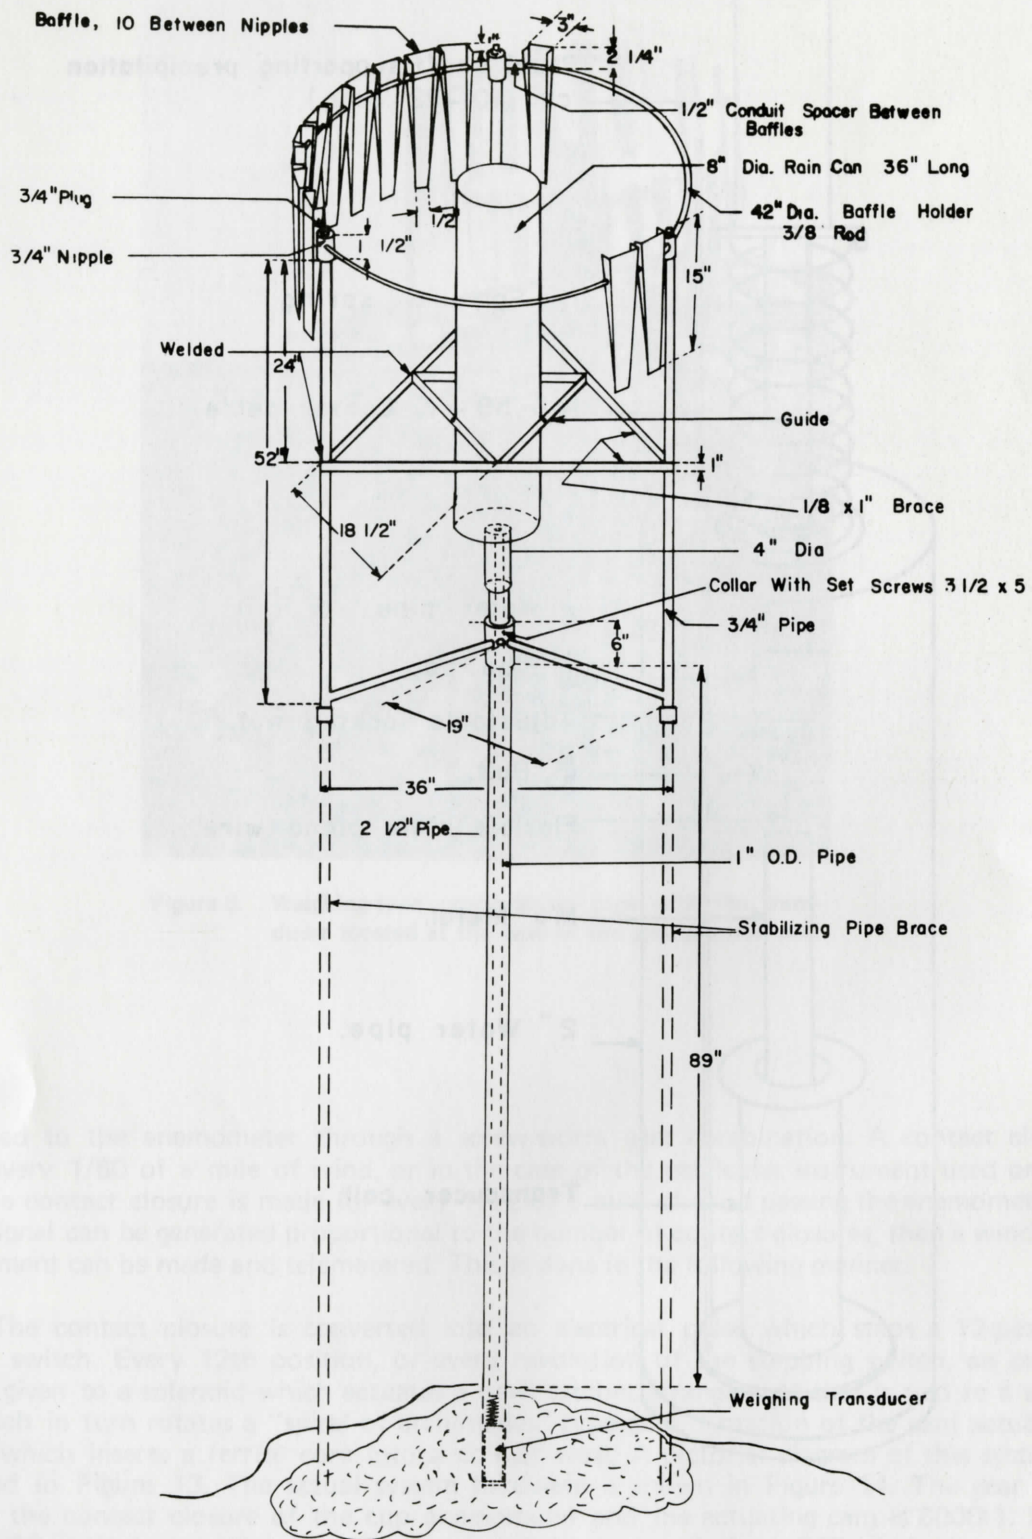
Rain gage assembly with underground transducer. Gage holding capacity is 36 inches. With minor modification a 70-inch gage can be installed.
